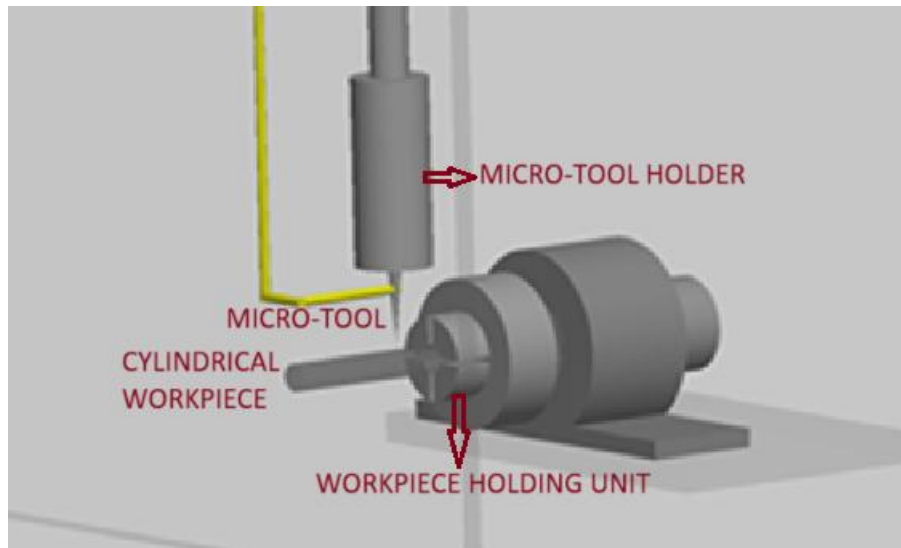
3D CAD drawing of job holding and tool holding unit
